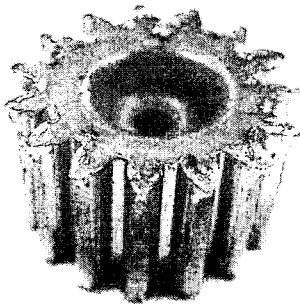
Under-filled defects occurred in lower portions of spur gear (upsetting type)
